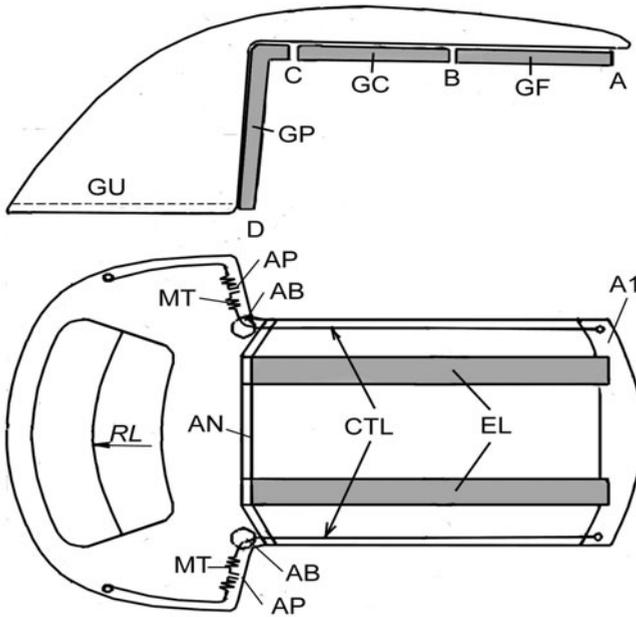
Main soft roof cloth parts. A, B, C, D: nodes; A1) first bow; AN) last but one bow; EL) side elastic strip; CTL) tensioning side wire; MT) pretensioning spring; AP) side rear run fitting; AB) loop ring; RL) back glass radius (> 3500 mm); GF) side front weather strip; GC) side central weather strip; GP) side rear weather strip; GU) last bow gasket.
